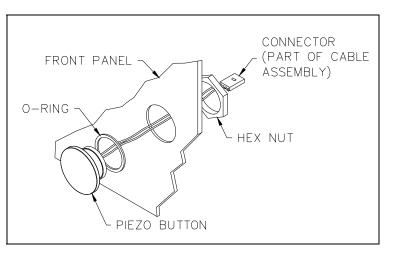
Piezo Push-Button Switch Assembly, Exploded View
